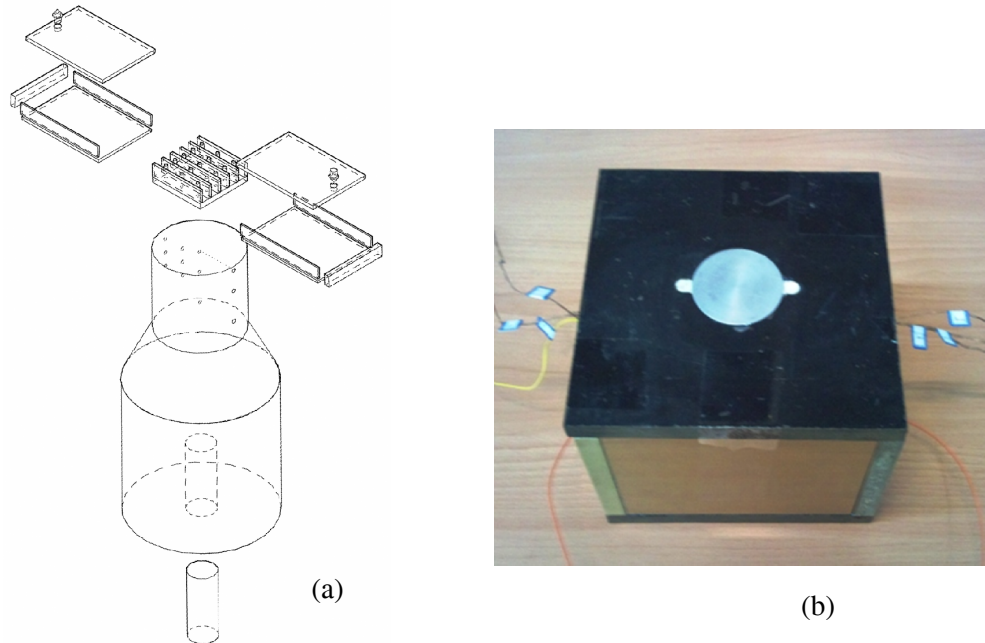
Geometric configuration of the heater block (a) and a real fabricated heater block (b)
